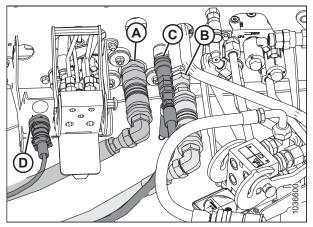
Header Drive Hydraulics – M2170 Connection Locations
